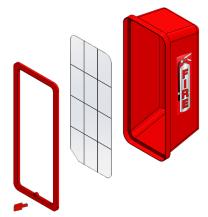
Cato Chief Assembly Tub, Acrylic, Frame, Hex Key
